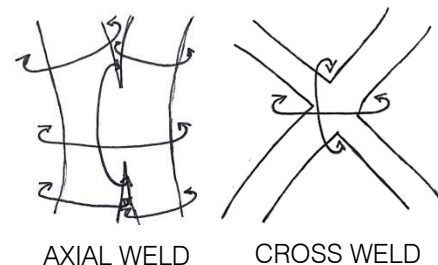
Sketches showing the axial weld and the cross weld.
